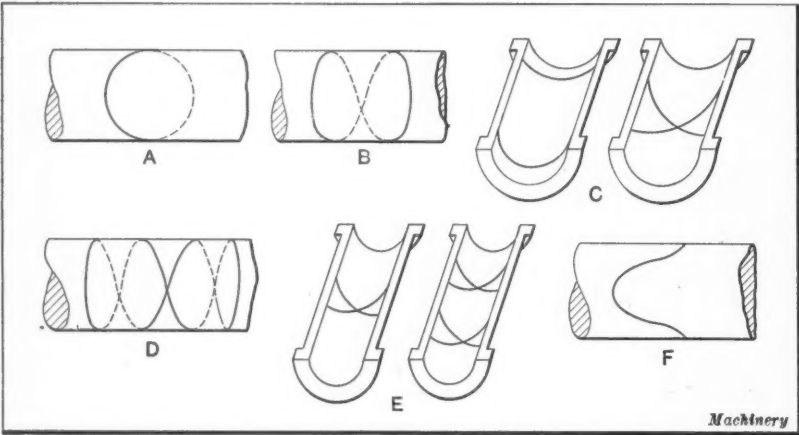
Different Styles of Oil-grooves produced with Lathe Attachment shown in Fig. 1
